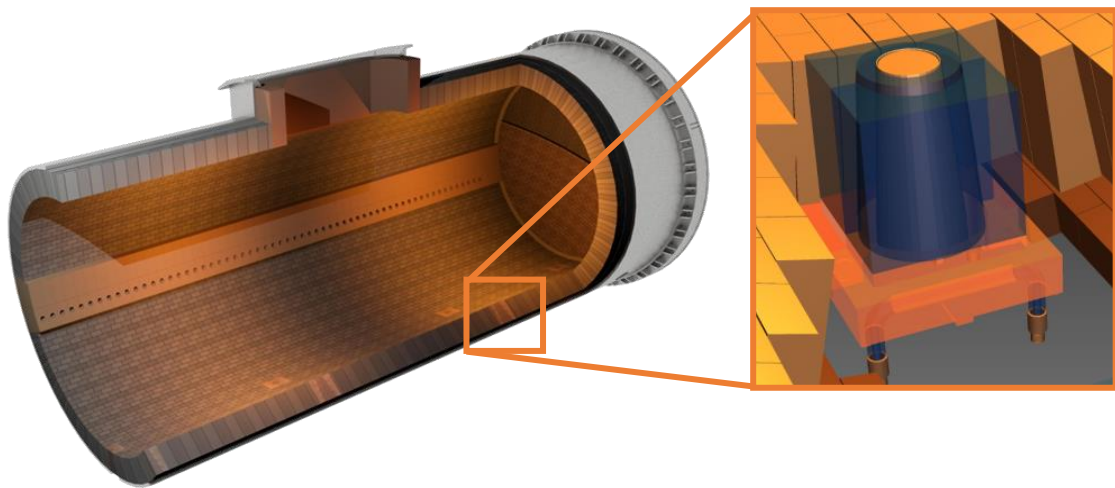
Peirce Smith converter equipped with purging plugs and detailed picture of the purging plug unit
